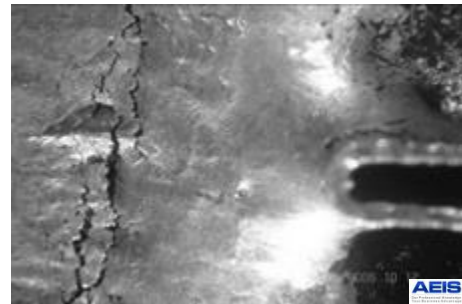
Cracks in the solder at header plate surface in the leaking radiator
